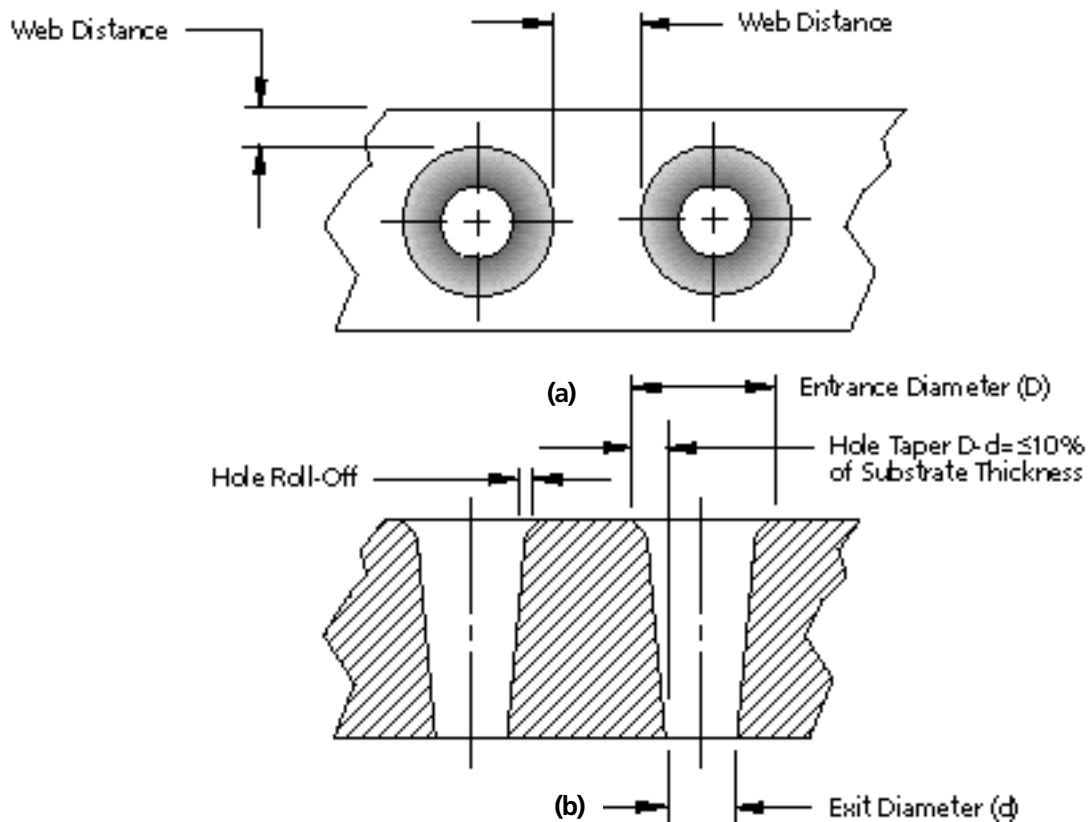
Typical Laser Drilled Holes: (a) Top View of Laser Drilled Holes; (b) Cross Section of Laser Drilled Holes
